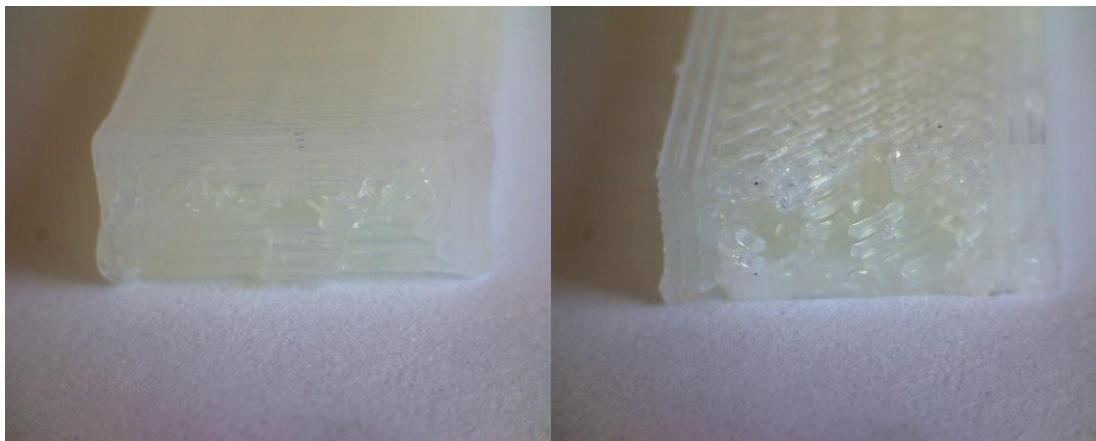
Fractures of PLA. Printed standing to the left and flat to the right
